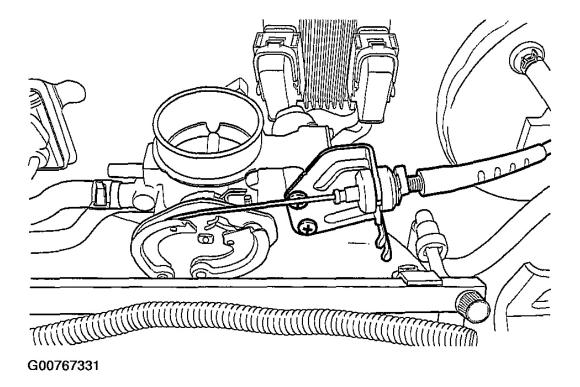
Disconnecting The Throttle Cable From The Throttle Body Courtesy of SUZUKI OF AMERICA CORP.
